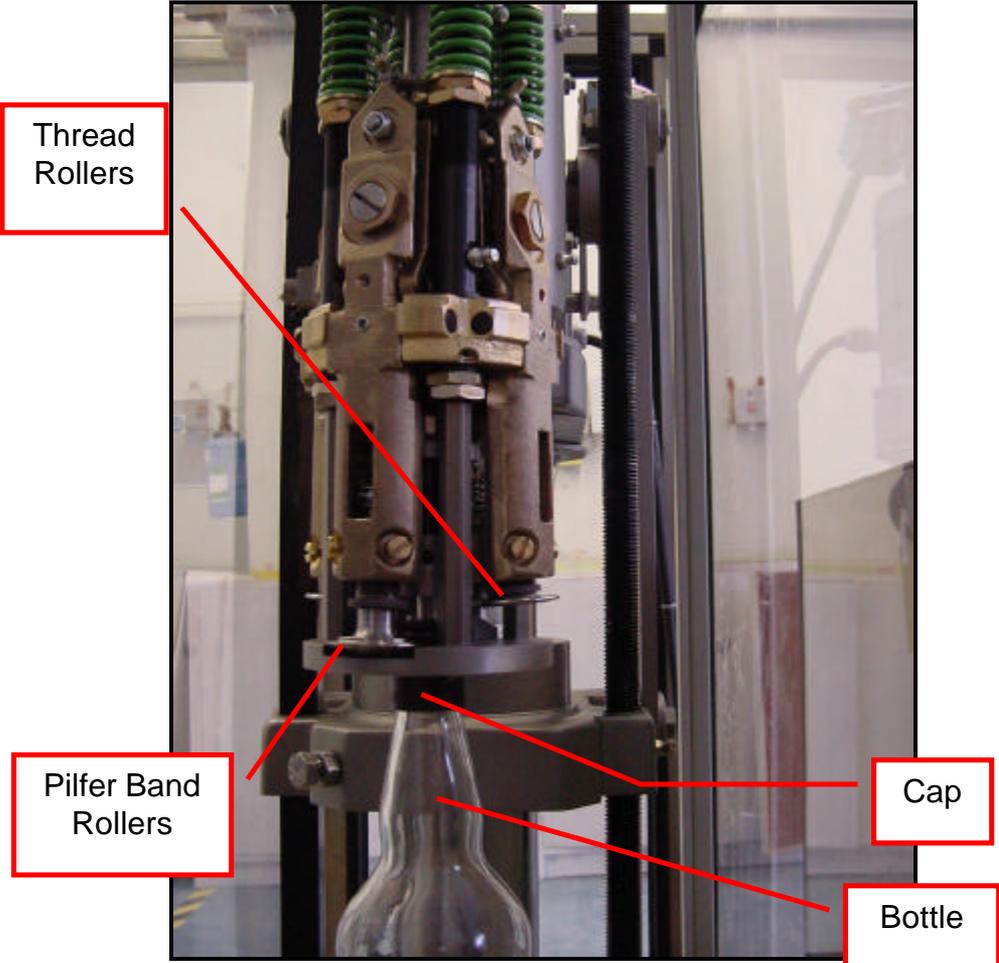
A single head capping machine used to roll thread and pilfer proof band into the closure.
